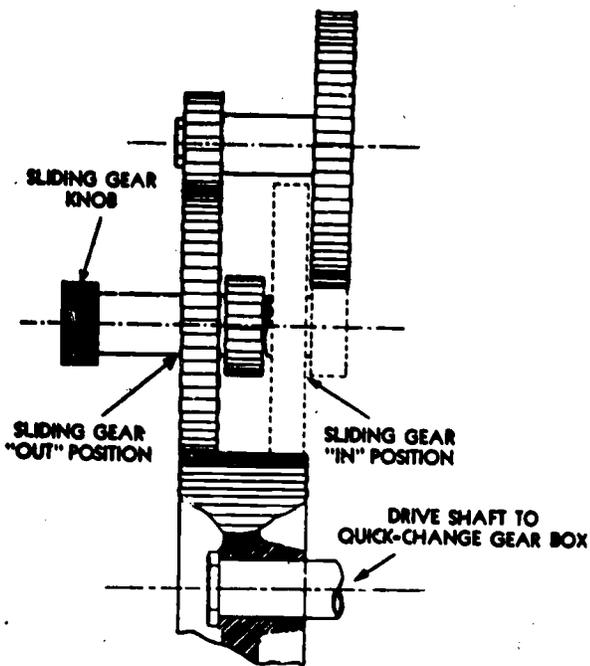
shows how the sliding compound gear produces two different gear ratios when it is moved in or out. The wide gear at the bottom corresponds to gear C in figure 7-14.
